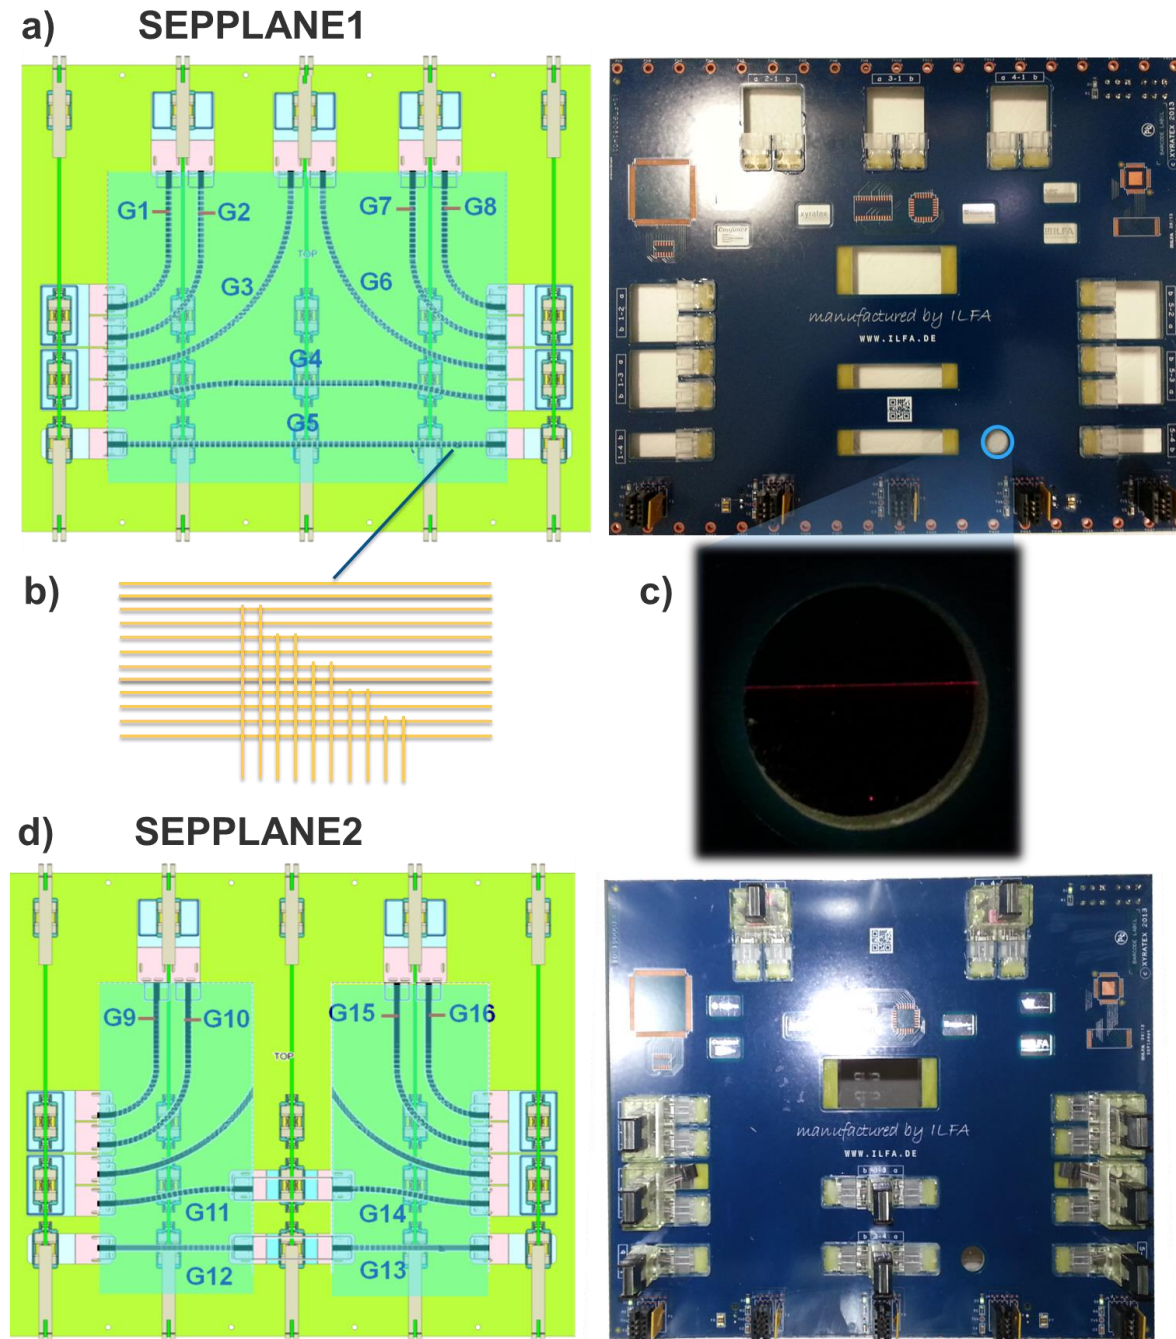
Schematic layouts and photos of fully populated OPCB backplane variants: a) SEPPLANE1 with single glass waveguide panel and connector layout, b) iterated waveguide crossover section, c) top view of embedded glass panel showing single waveguide illuminated, d) SEPPLANE2 with dual glass waveguide panel and connector layout
